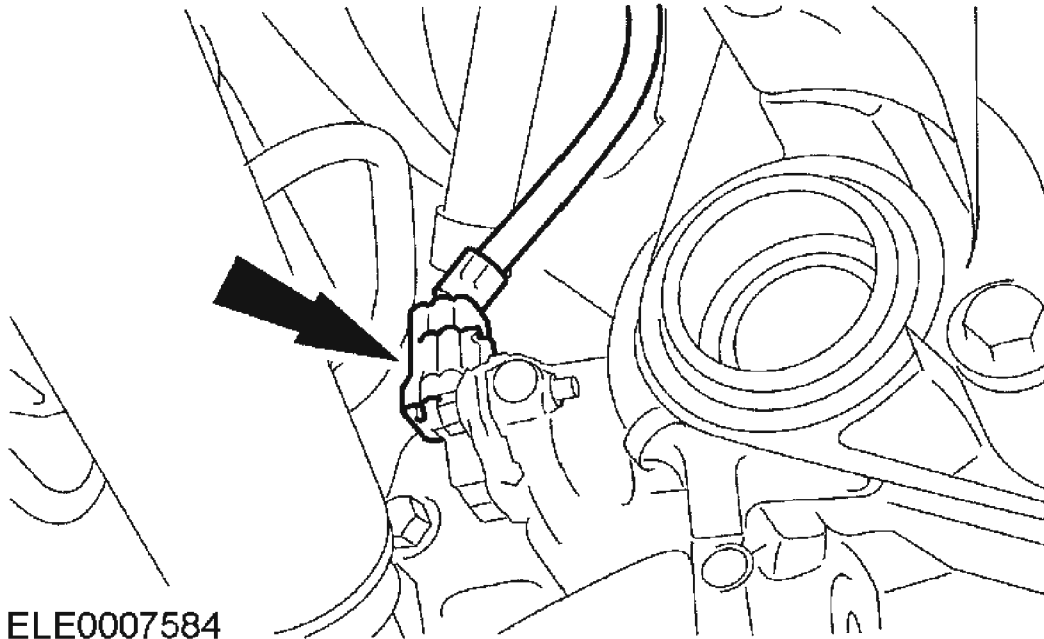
Connecting Output Speed (OSS) Sensor Electrical Connector
